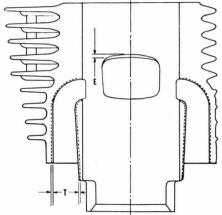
The exhaust port should be raised (E) 2 MM, but should remain same shape. Enlarge transfer passages (T), but DO NOT change shape or size of transfer or boost ports.
